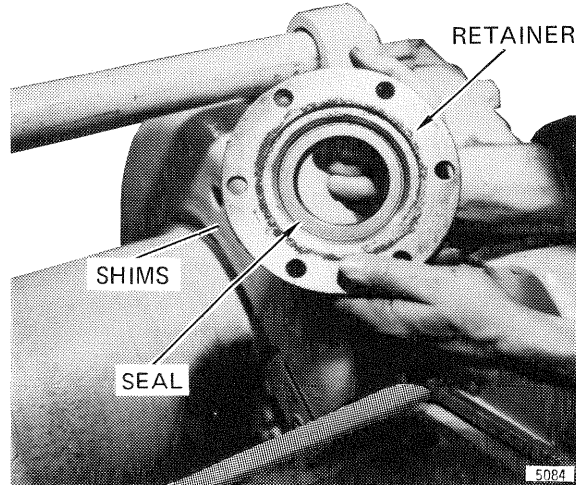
REMOVAL AND DISASSEMBLY OF CLUTCH SHAFT ASSEMBLY (Sheet 4 of 4)
